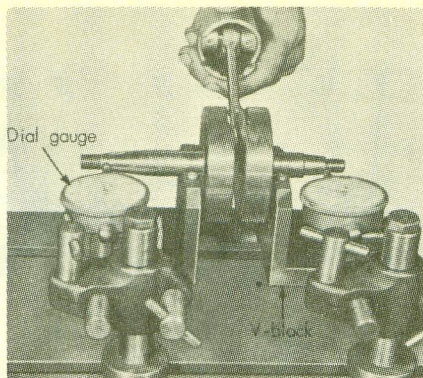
Method of measuring crankshaft run-out (eccentricity) using "V" blocks and dial indicators is shown above.
